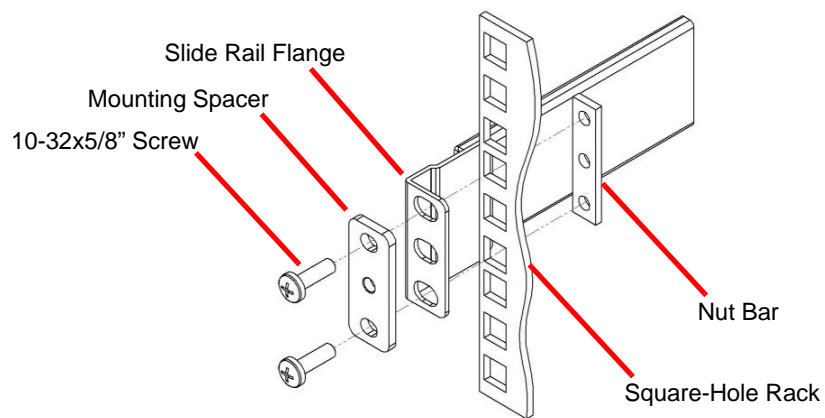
53. Attaching the Slide Rail to a Square-Hole Rack
